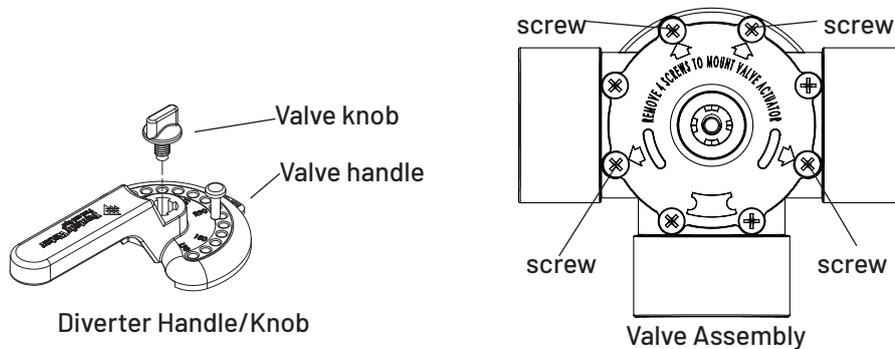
Actuator mounting screws on Pentair 3-way valve.
